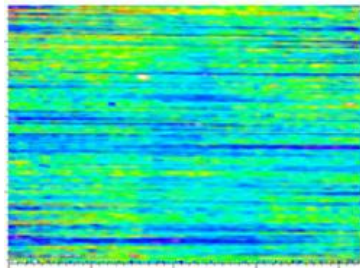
Mill-Finish (MF) surface. [Liewald et al. (2010)]
